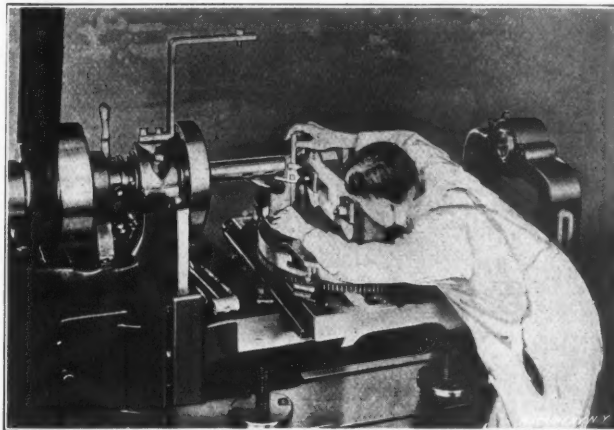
Apprentice setting up Jig for Boring on the Horizontal Boring Mill
